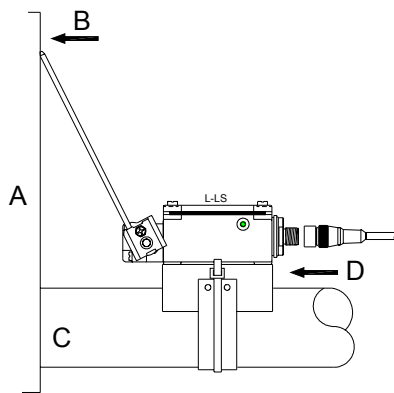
Lynx™ Mold-Closed Limit Switch side view
